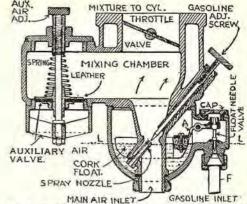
Typical example of a carburetor using an auxiliary air valve.
